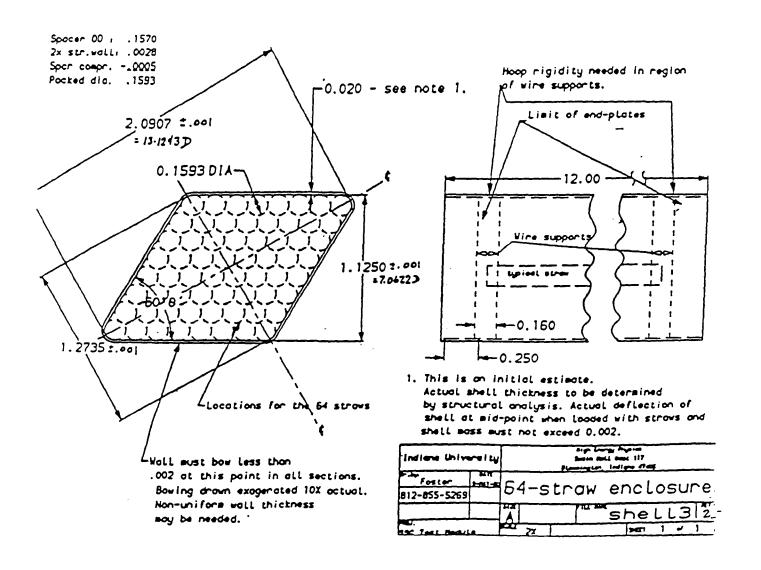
Drawing of the 64-tube prototype carbon fiber shells.
